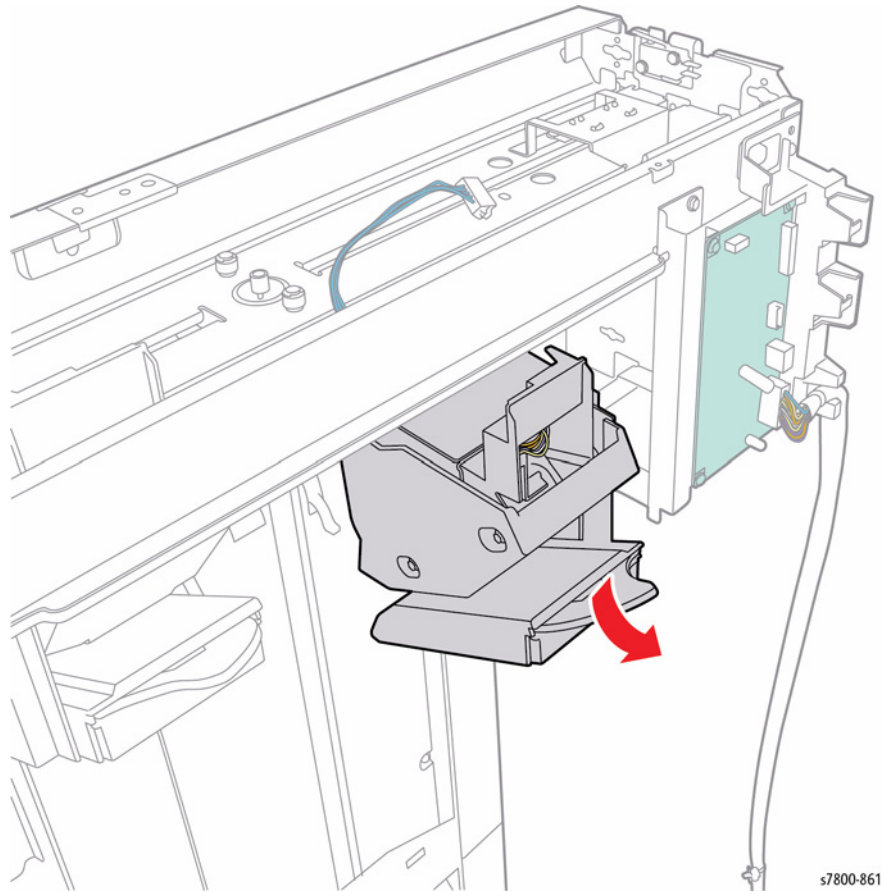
Removing the Booklet Stapler Assembly (Front/Rear)
